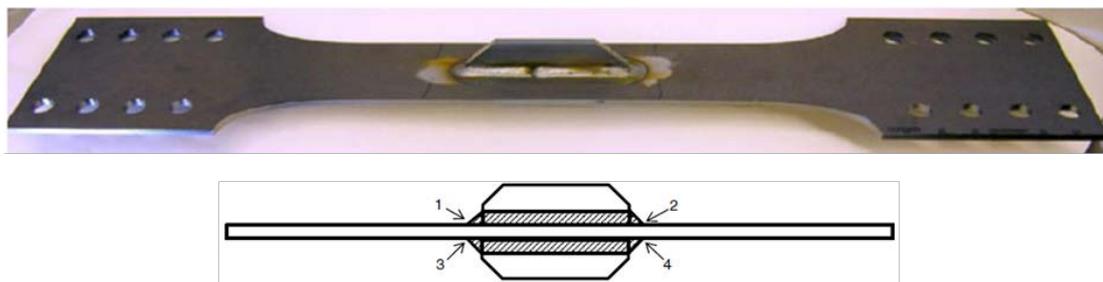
Illustration of the “non-load carrying longitudinal attachment” test specimen used in the study and the weld toes. Adapted from [19].
